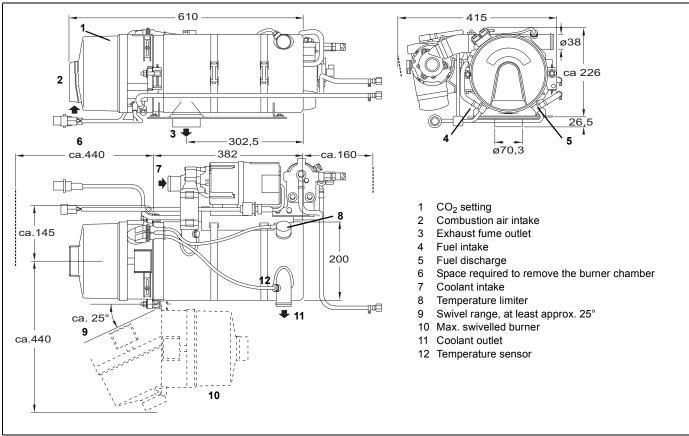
Dimensions of the Thermo 230 / 300 / 350 Rail heater
